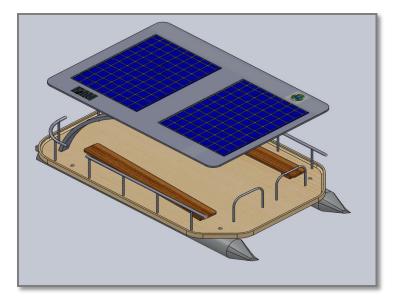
Friendly Shallow Draft Boat Design Prototype
